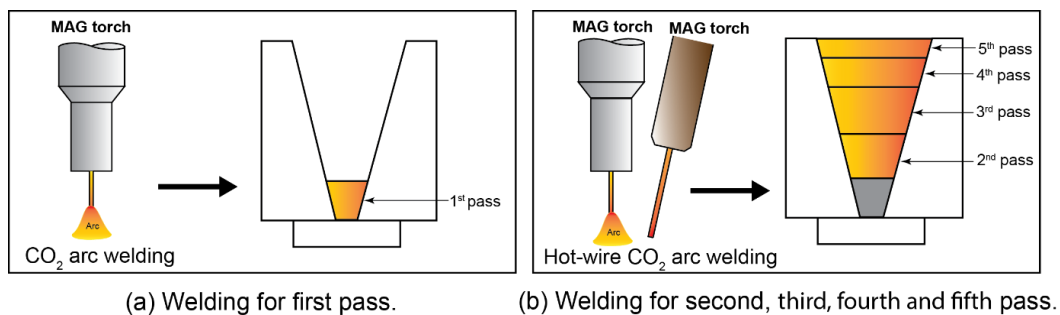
Schematic illustration of welding pass plan.
